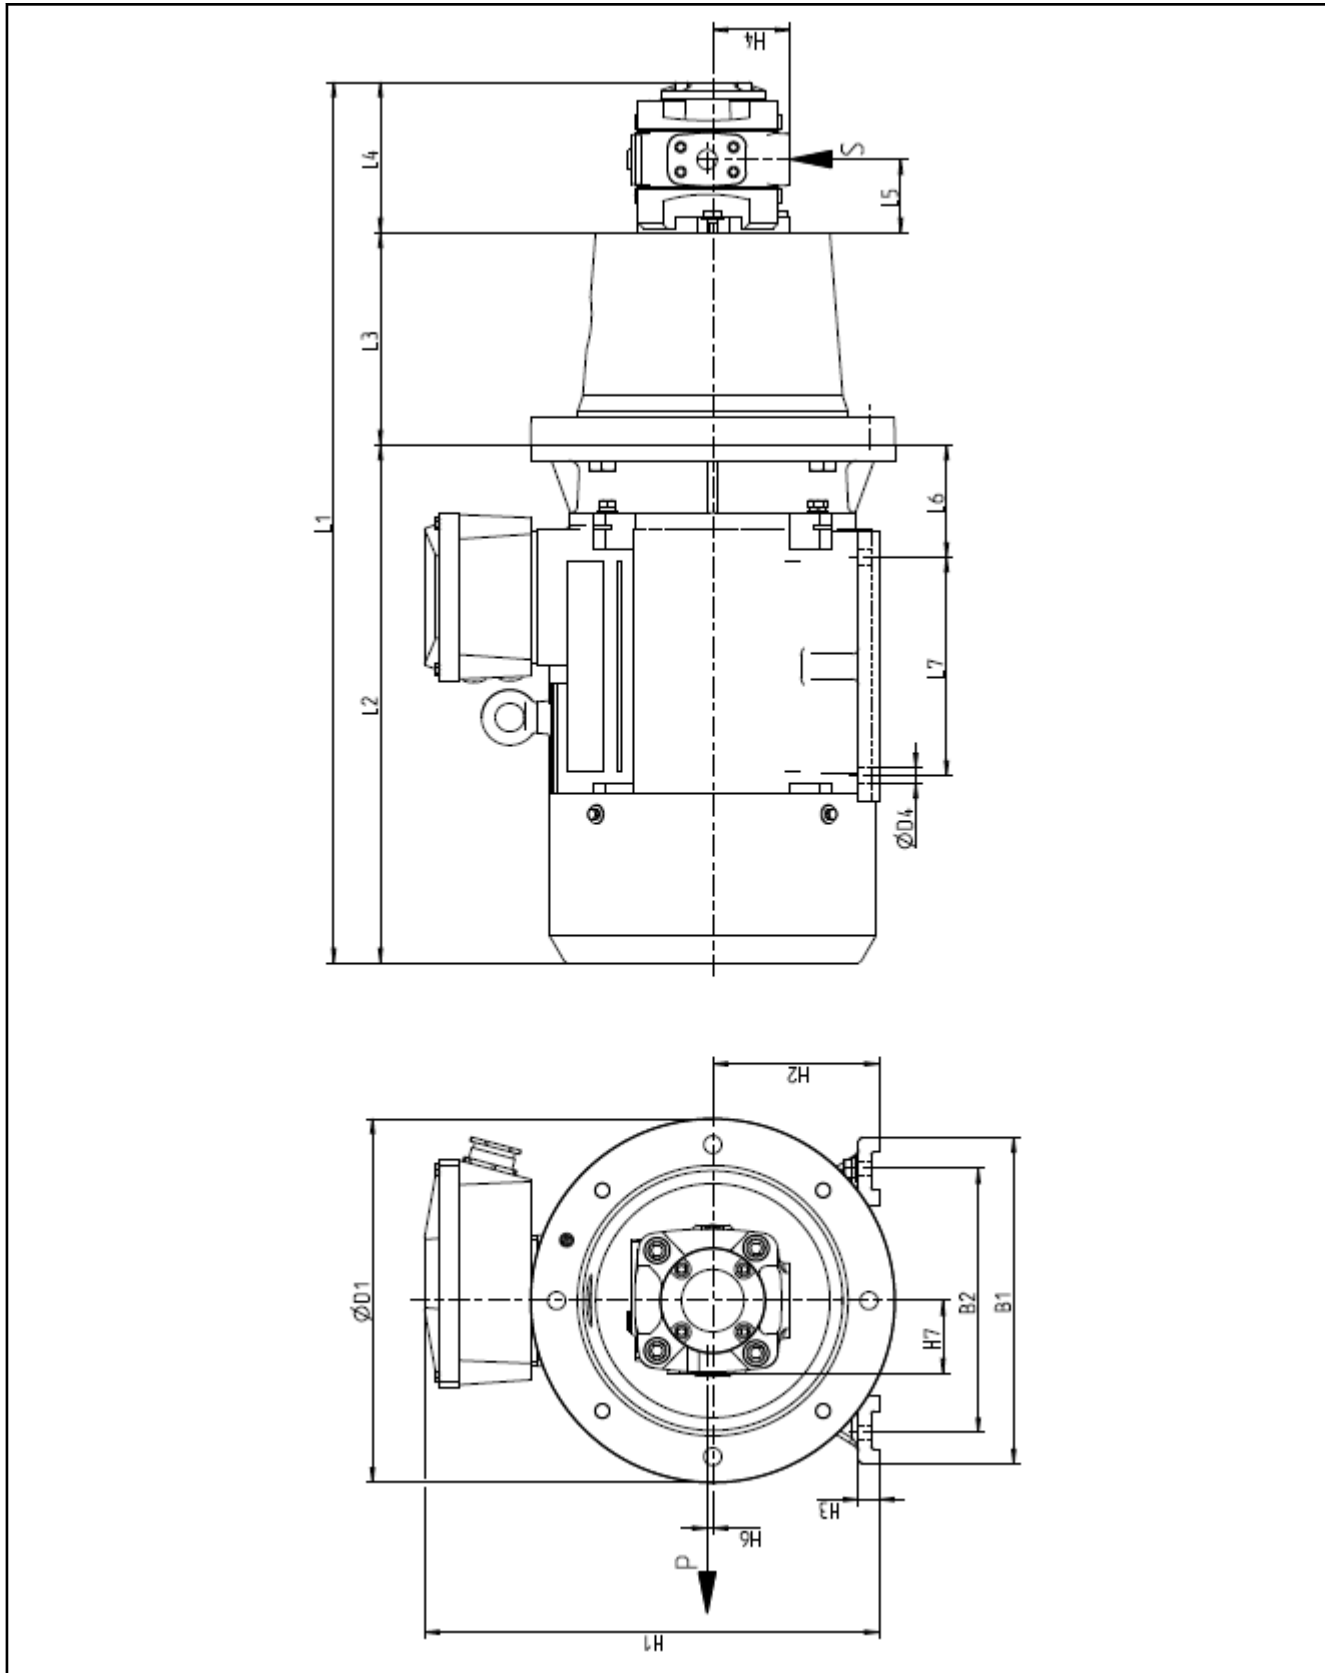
Dimension sheet "MPES2" with "PGH5" in the fastening mode "A" (horizontal foot fastening)
